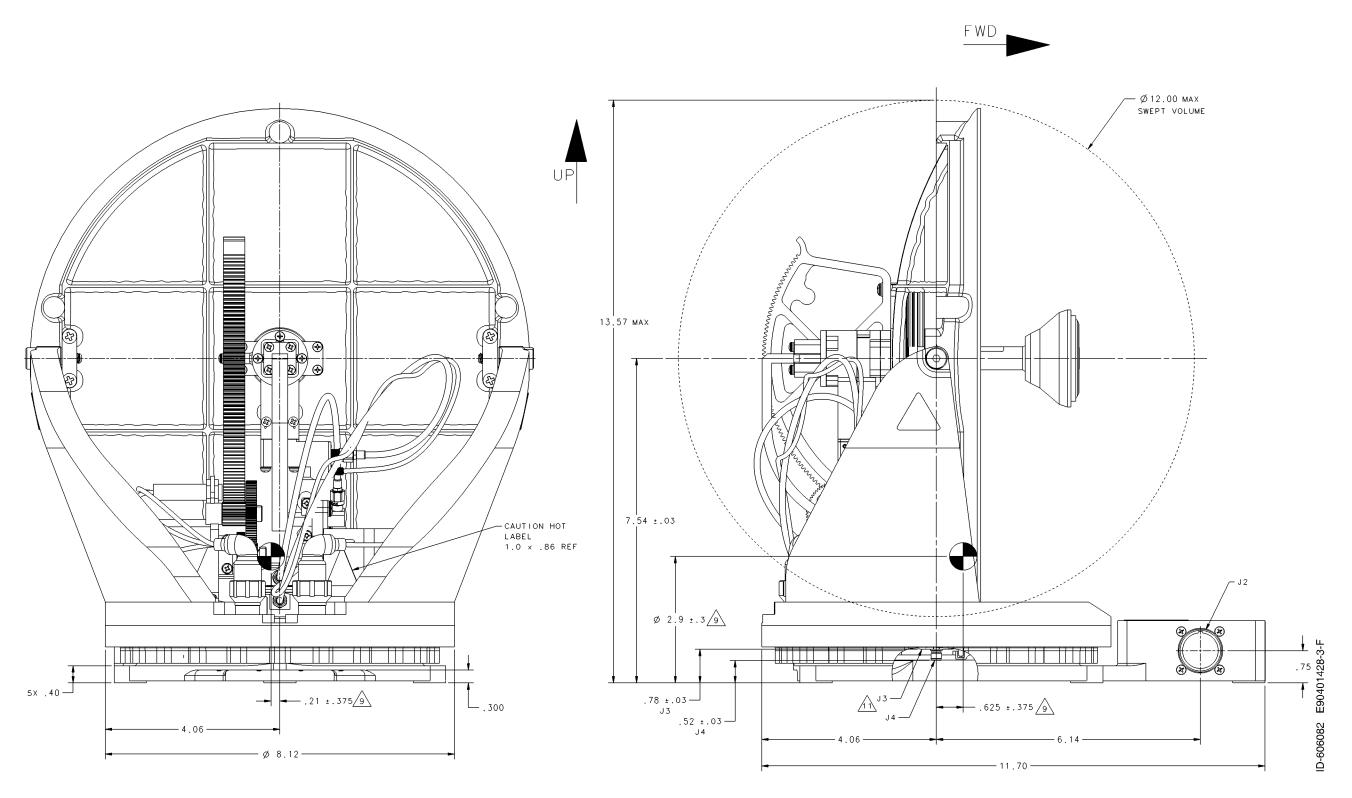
(Sheet 3 of 4) TMA Outline and Installation Drawing (90401428, REV F)
